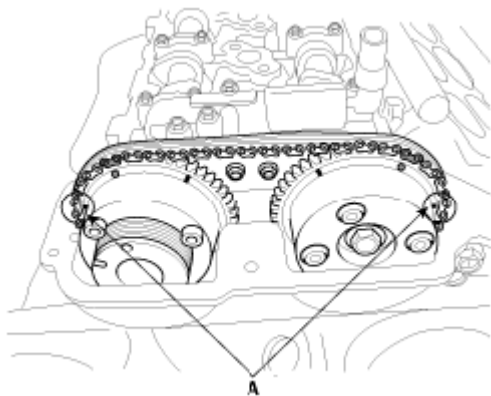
Identifying Mark Of Camshaft Timing Sprockets (2 Of 2)
